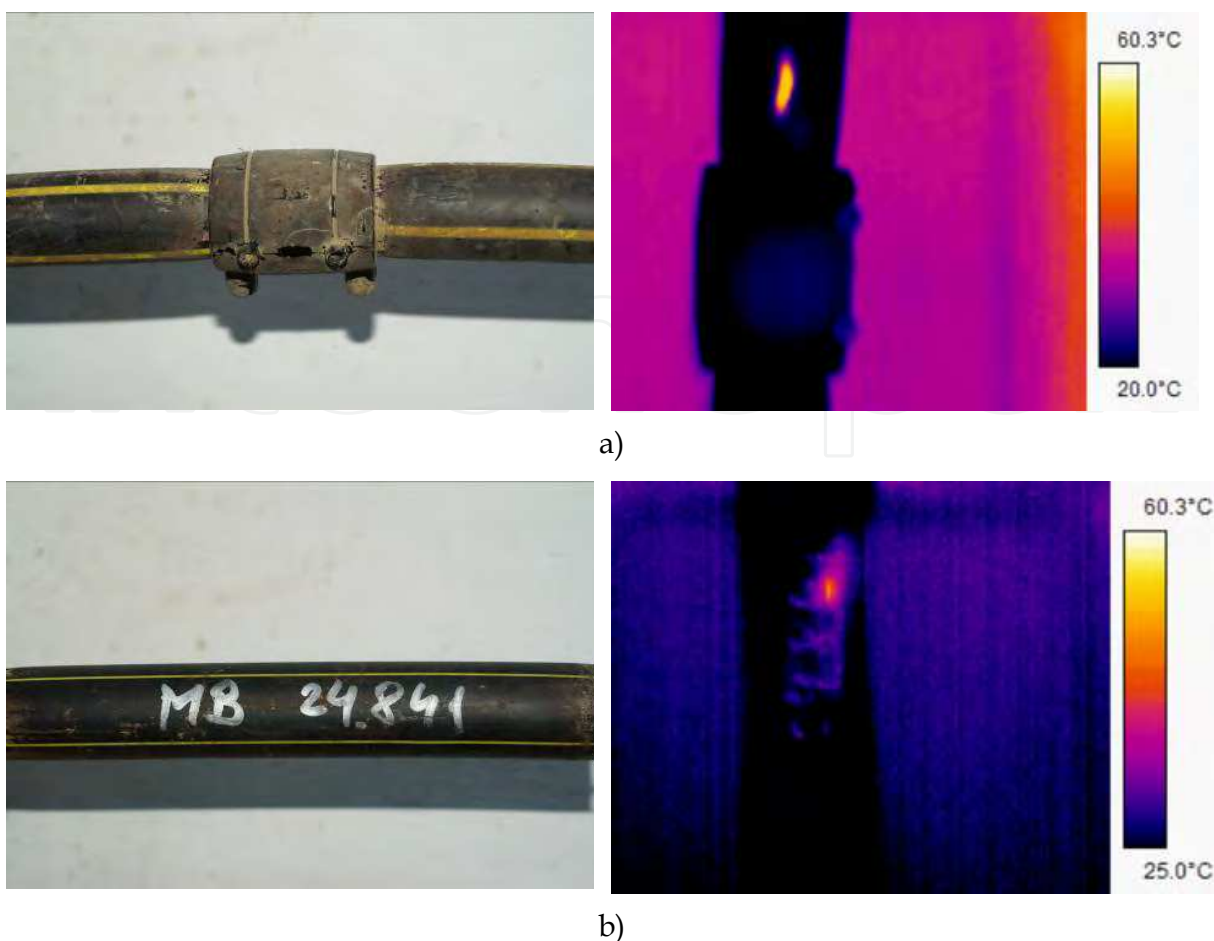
PE 80 pipes with flaws obtained on hydrostatic inner pressure test at a constant temperature (80°C and 10 bar); a) sleeve welded joints with flaws in the MB, b) PE 80 pipe cracked after 24841 hours of testing
